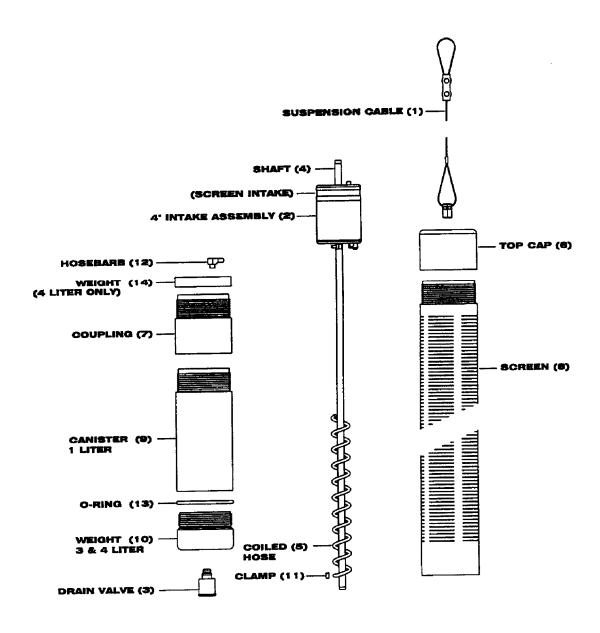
Standard 4" PRC Skimmer Assembly (3&4 Liter) Parts List 16
